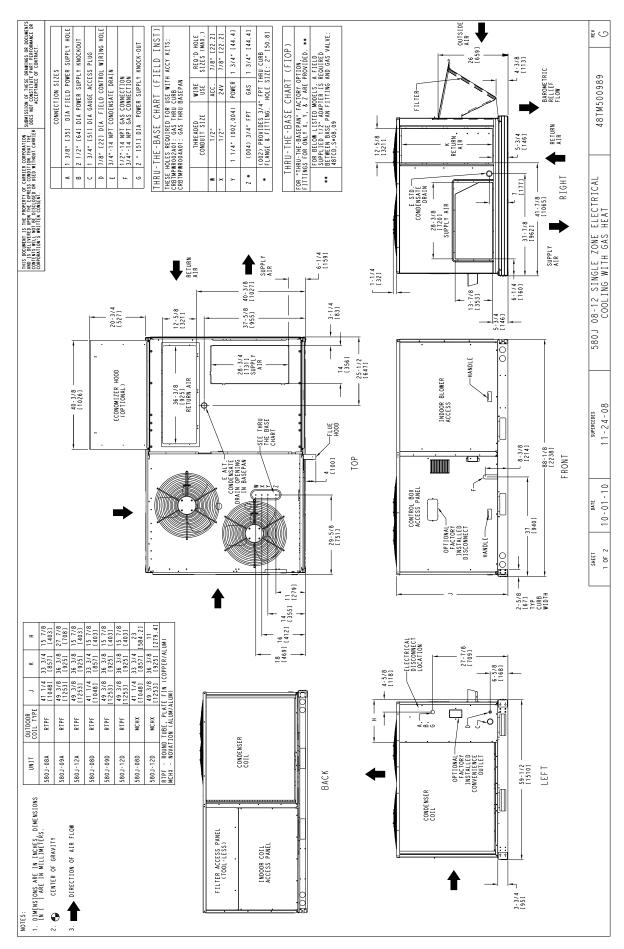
Unit Dimensional Drawing Sizes 08, 09, and 12
